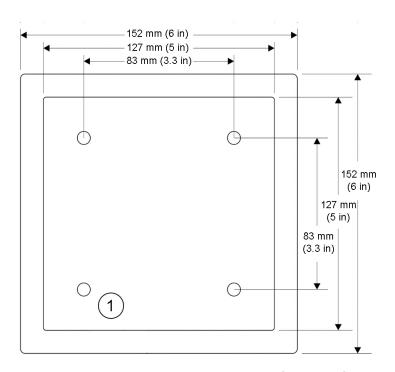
RDP-110C Mounting Dimensions (Rear Panel)
